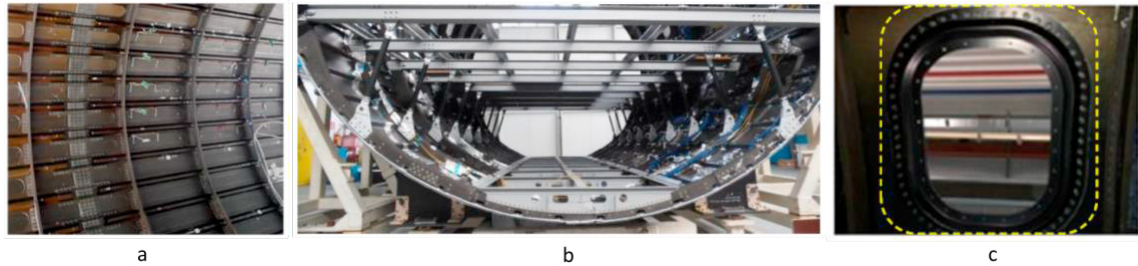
Some structural details: (a) frames; (b) cargo zone; (c) window frame.
